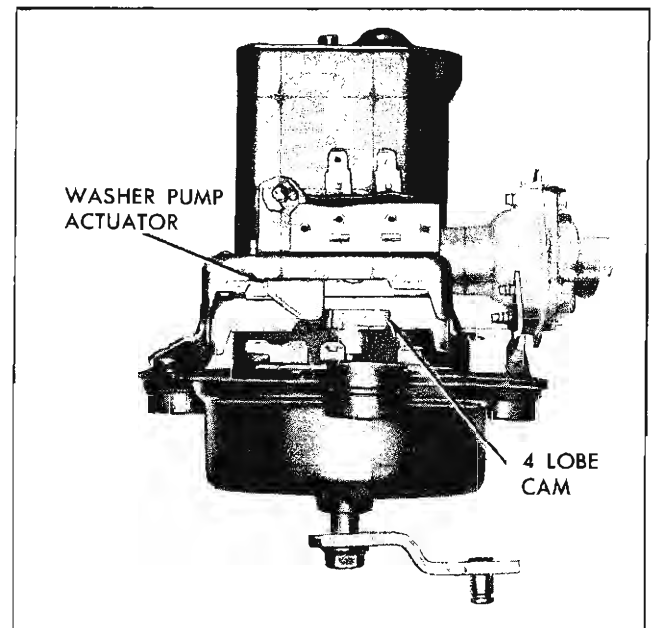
Washer Pump Drive Cam—Chevelle & Chevy II Shown
